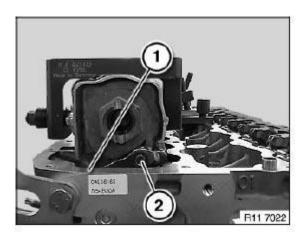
Positioning Intake Camshaft 6th Cylinder Courtesy of BMW OF NORTH AMERICA, INC.
